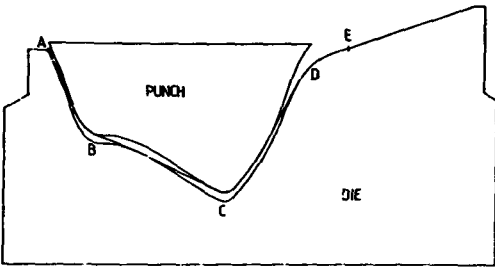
Deformed pattern at 80mm punch displacement (arbitrarily-shaped tools)
